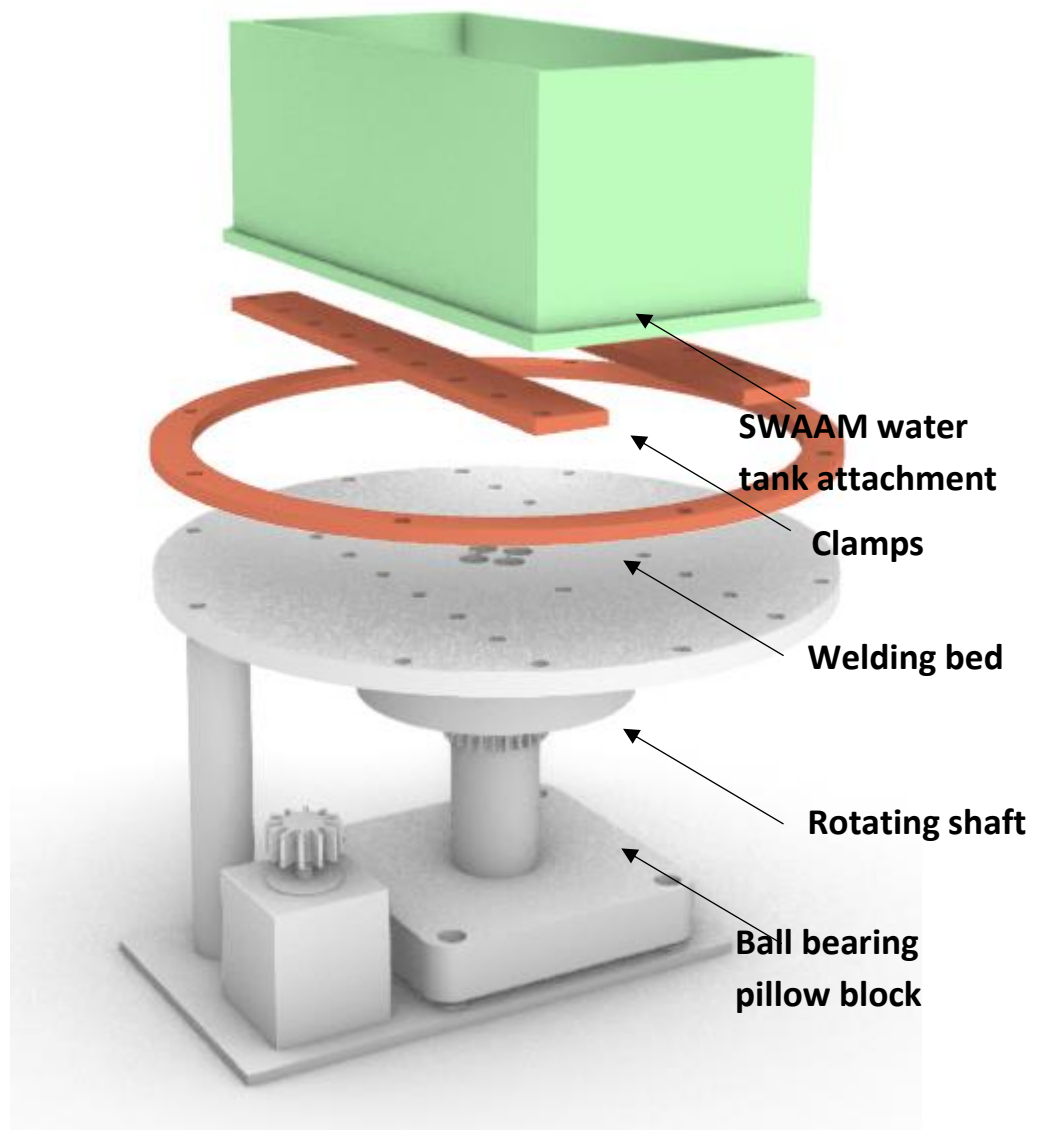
Rotating welding bed design for the GTAW-DED experiment apparatus
